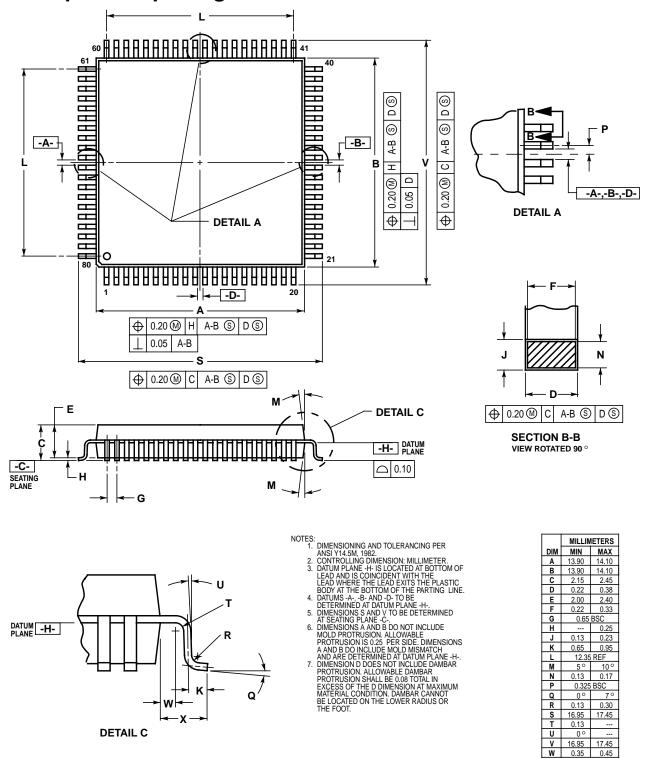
80-pin QFP Mechanical Dimensions (case no. 841B)
